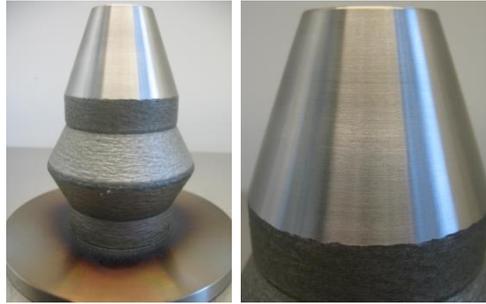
(a) Part generation by means of LMD; (b) Close-up view of the part after mechanical post-processing
